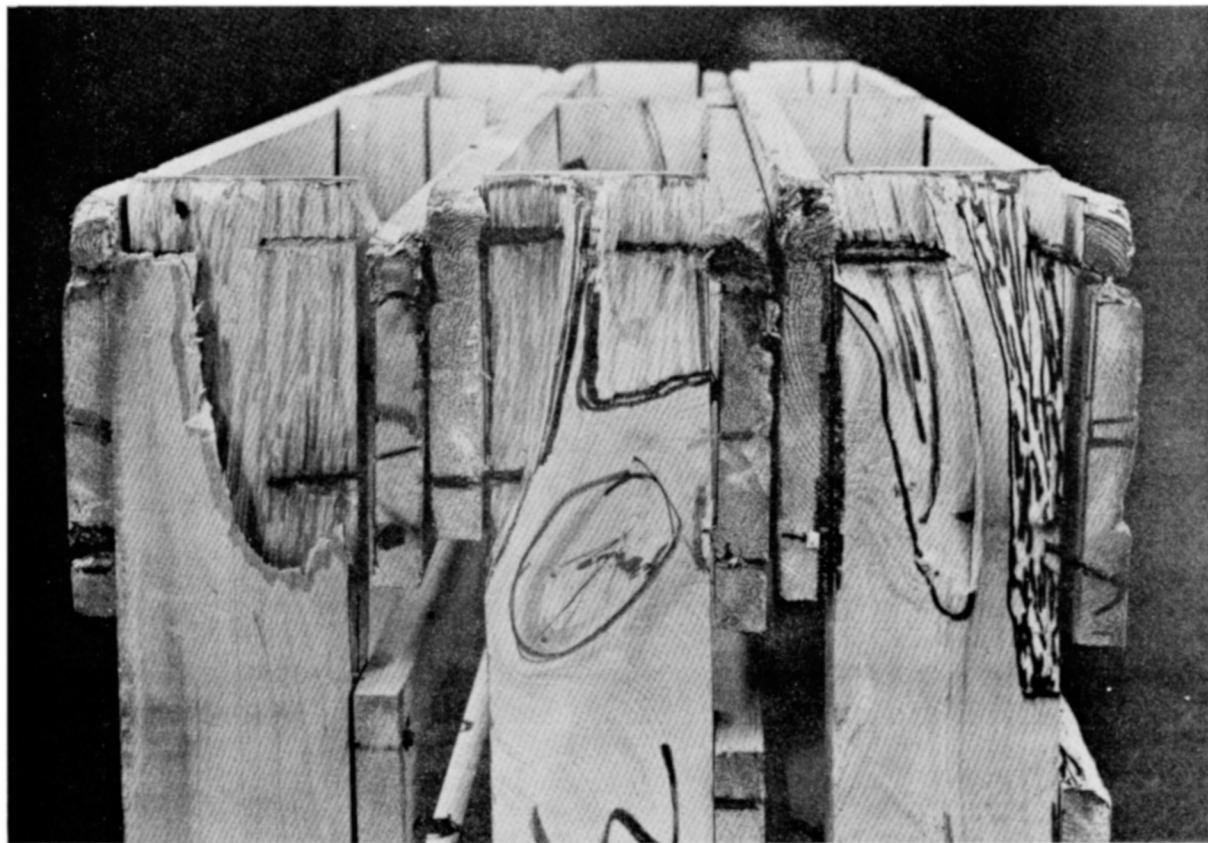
Diagonal corner splitting across a pallet's stringers (2-1995) caused by corner dropping in the 14-ft revolving drum.
